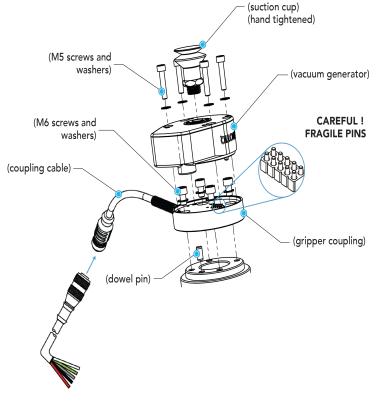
Installing the Vacuum Gripper onto the robot wrist
